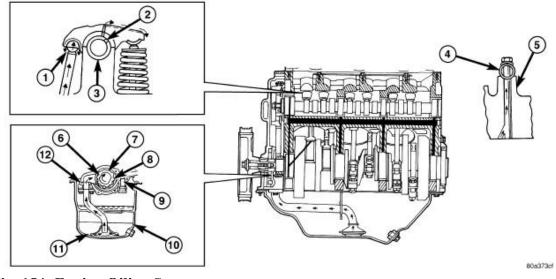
Engine Oiling System Courtesy of CHRYSLER LLC
